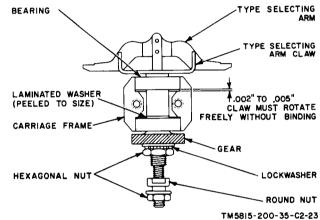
Type selecting arm claw assembly end-play requirements.
